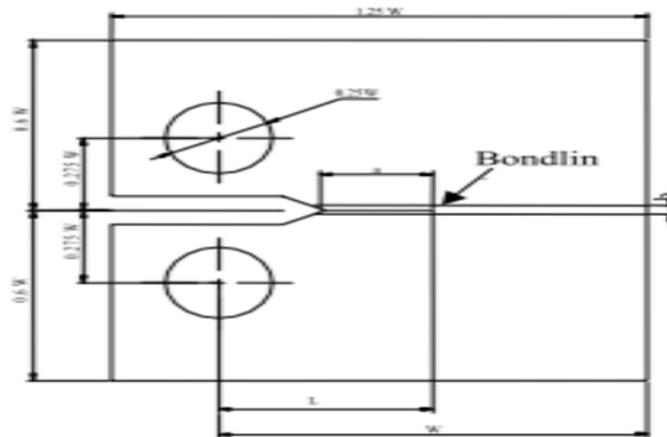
Configuration of the compact tension specimen with centered bonded line and pre-crack
